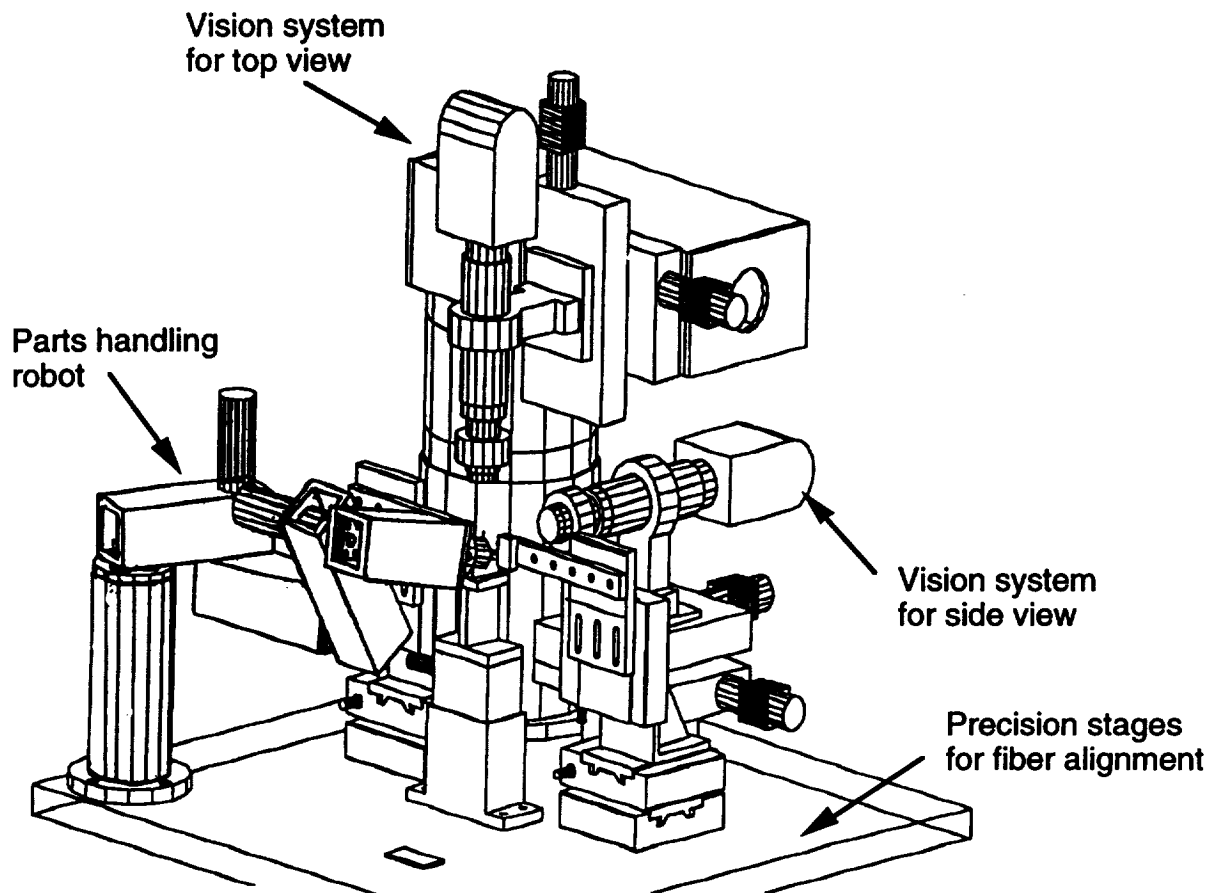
LLNL Automated Opto-electronics Packaging Machine
